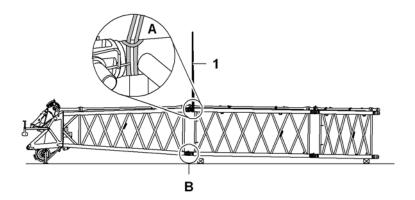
Bolting the boom head section to the boom sections at the bottom
